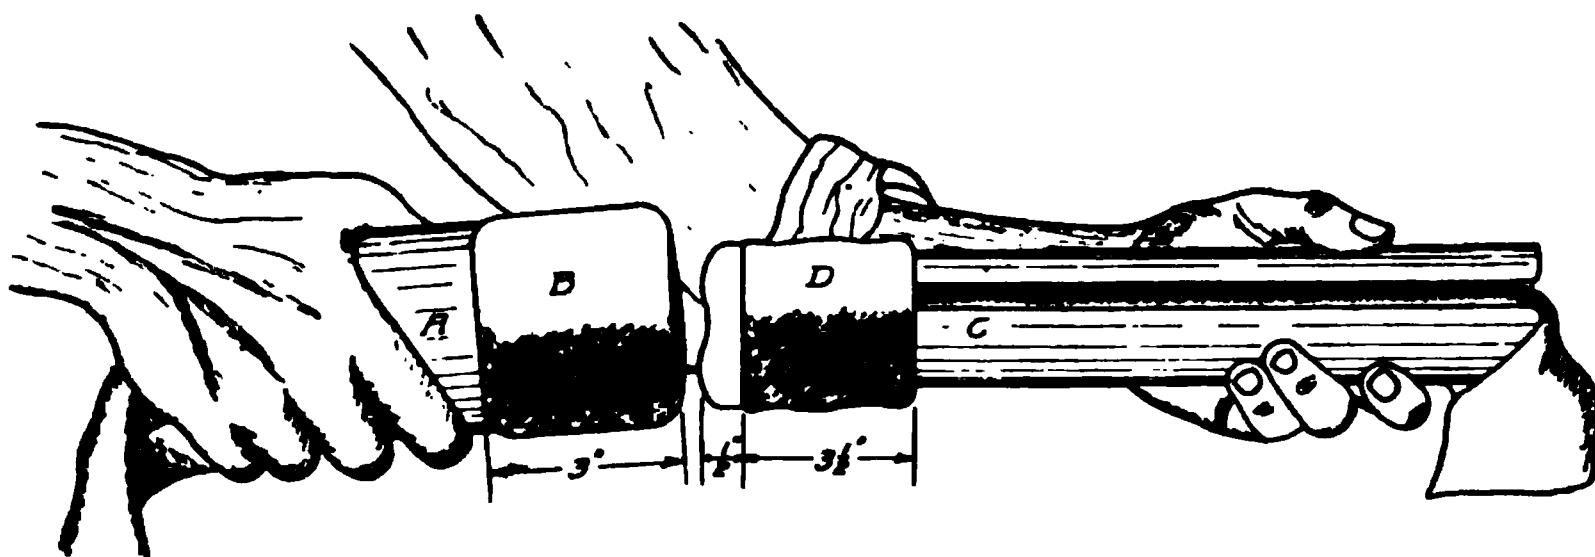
Sketch Showing Method of Inserting New Section in Inside Tube
